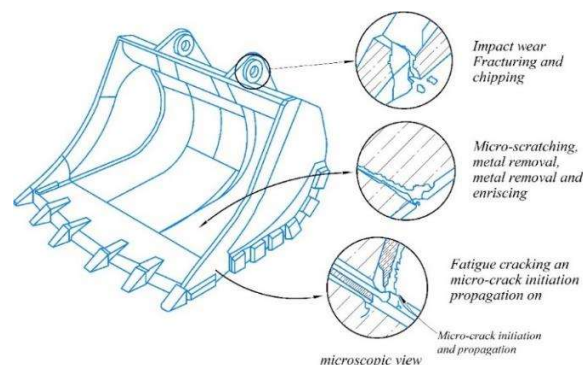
Abrasive wear, mechanical fatigue cracking, and sliding friction of the bucket.
